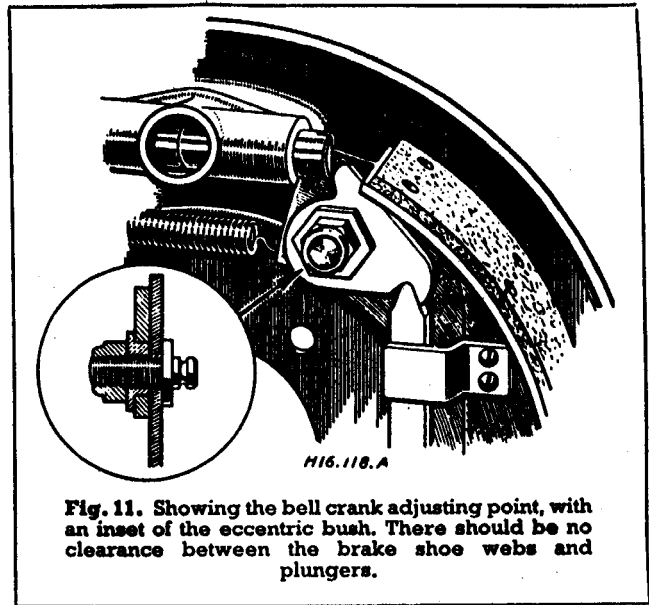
Showing the bell crank adjusting point, with an inset of the eccentric bush. There should be no clearance between the brake shoe webs and plungers.
